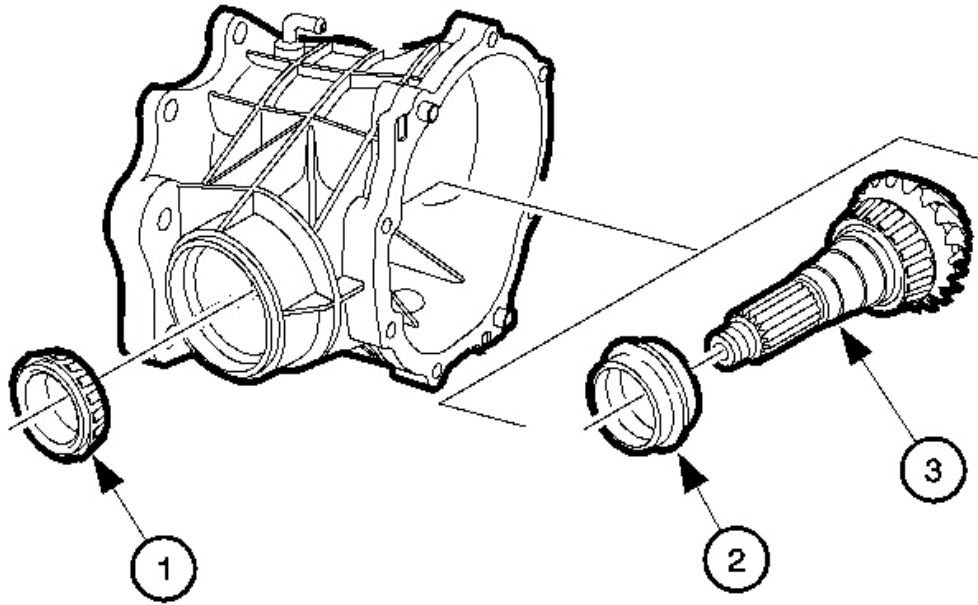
Removing/Installing Collapsible Spacer, Pinion Shaft & Bearing Onto The Pinion Shaft
